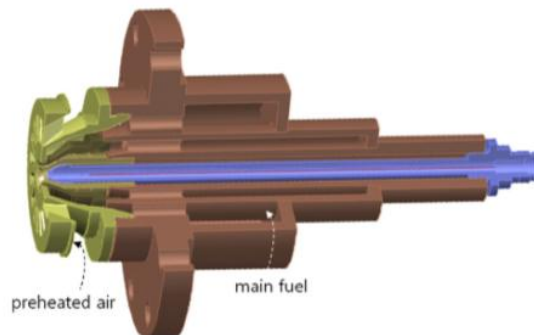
A cutaway view of the model combustor GE 7EA [22].
